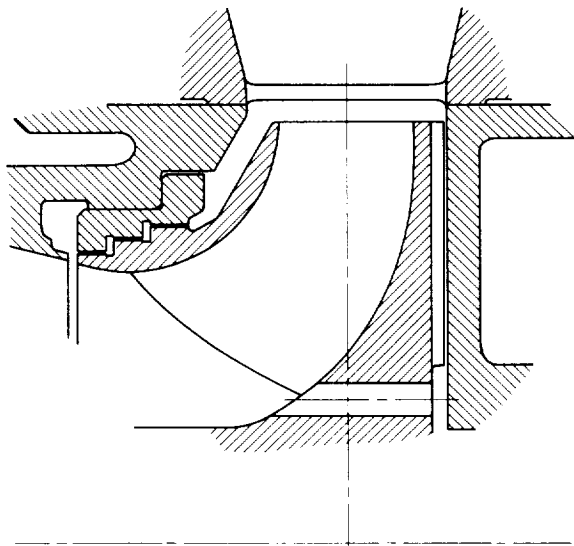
Axial thrust balancing by external vanes on back shroud of impeller.
